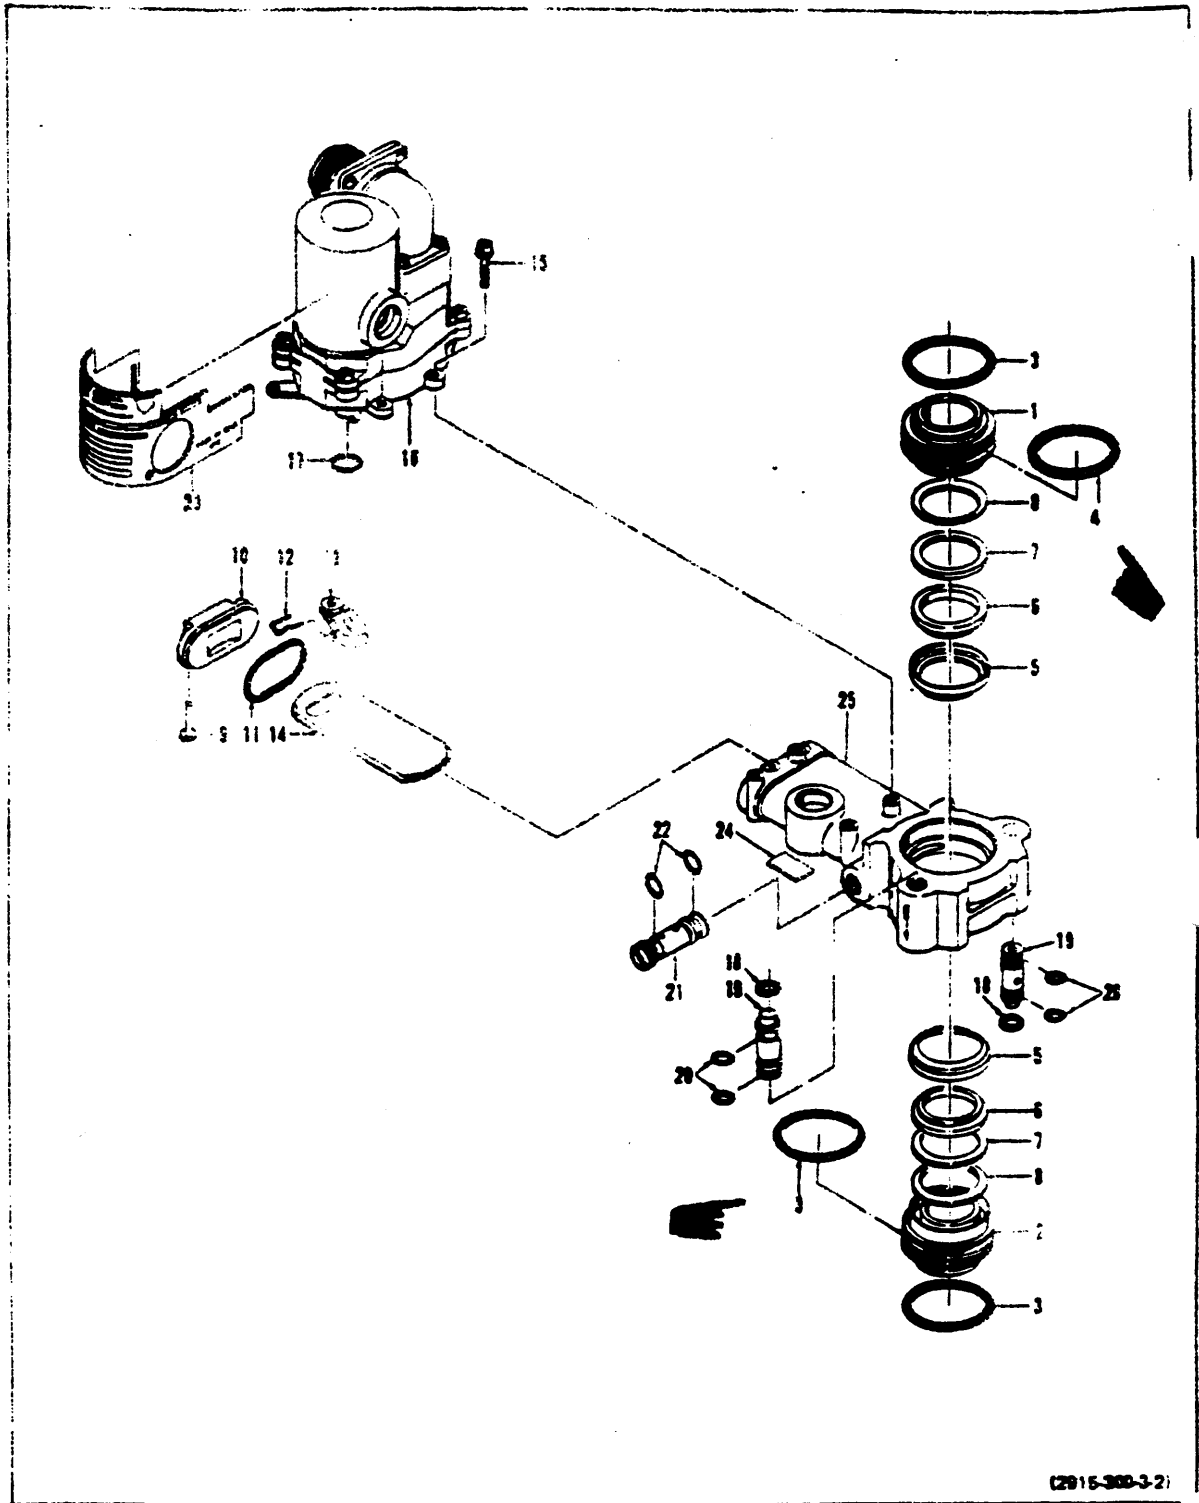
Gate Shutoff Valve Assembly, Part No. AV16B1667D
